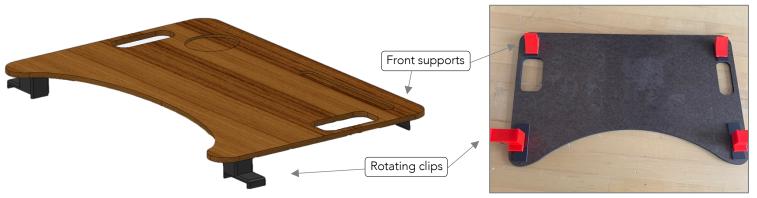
CAD assembly model of curved controller slot tray with rotating clips and front support attachments
